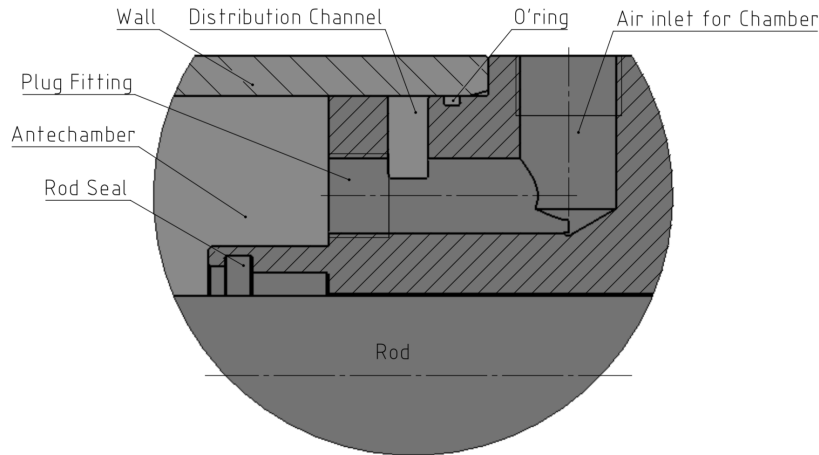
Halfway cut of the Head, showing the air bushing and head cap.
